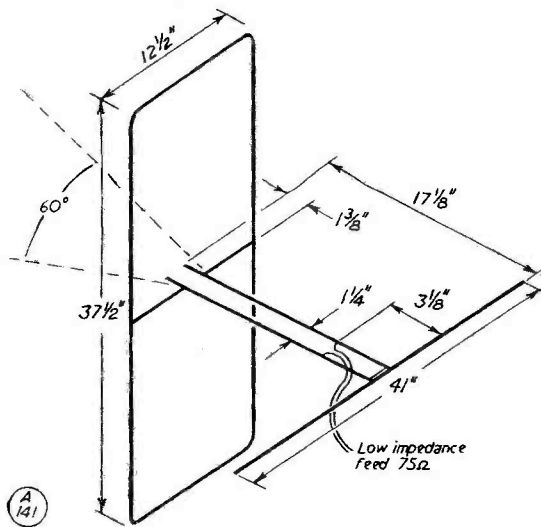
All dimensions for a two-metre Skeleton Slot, using closed-quarter stub matching. Construction is in $\frac{3}{8}$ -in. diameter rod and no insulating material is called for anywhere. Mounting can be on a metal mast section, bolted to the stub end. An ideal beam for portable work.
